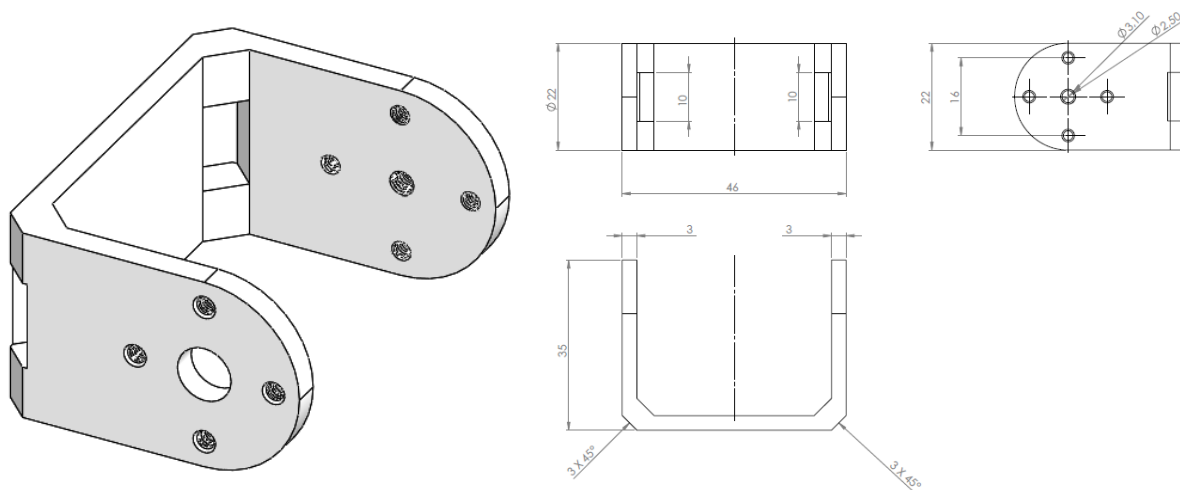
Technical Drawing and Trimetric Views of the Connecting Kit
